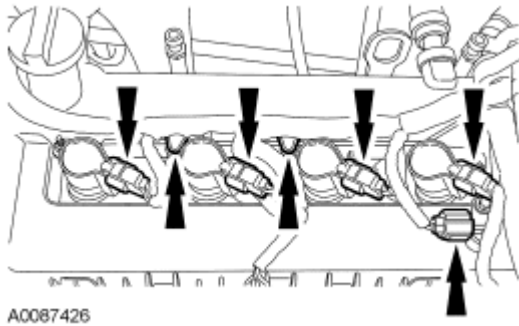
Locating Camshaft Position Sensor Electrical Connectors And Coil-On-Plug
